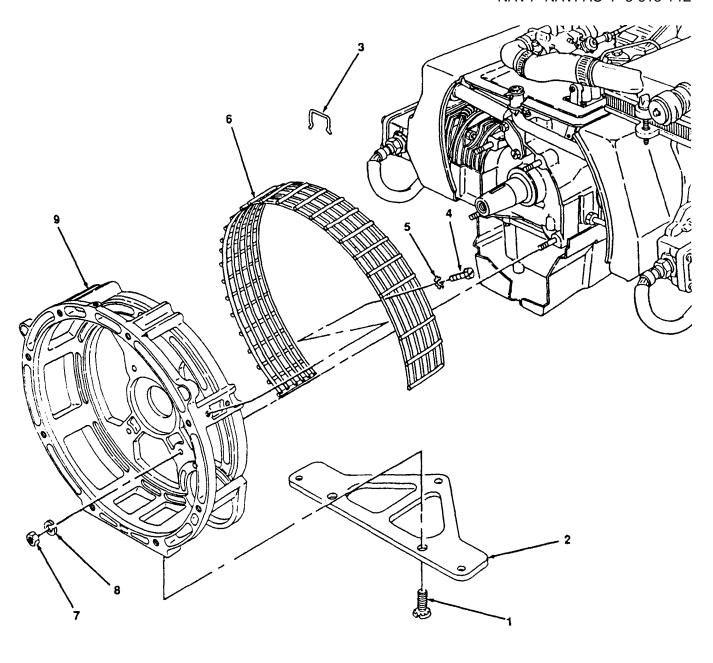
Flywheel Housing and Protective Screen, Removal, Inspection and Installation.
